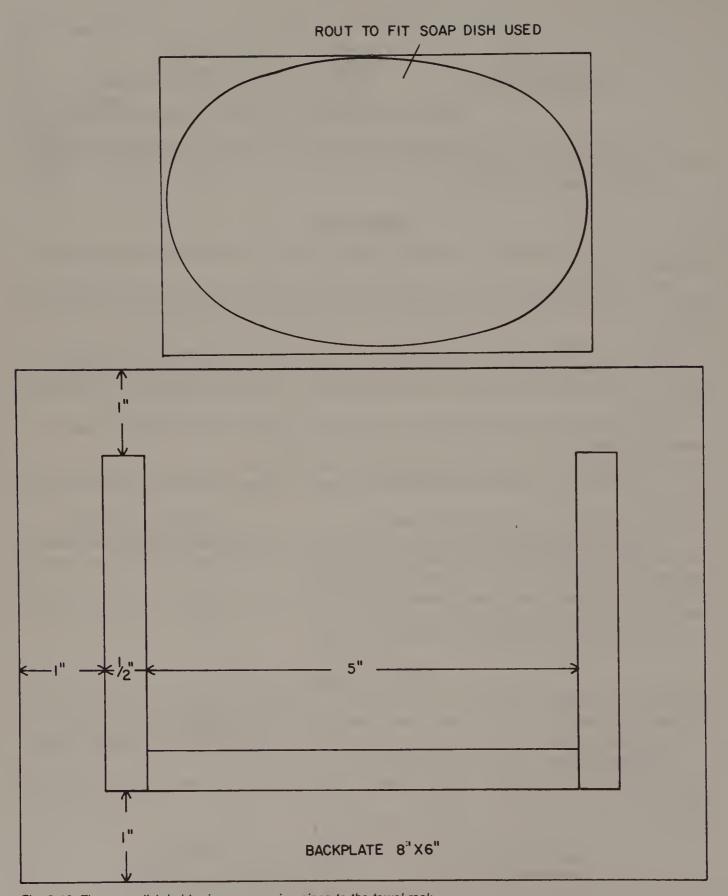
The soap dish holder is a companion piece to the towel rack.
